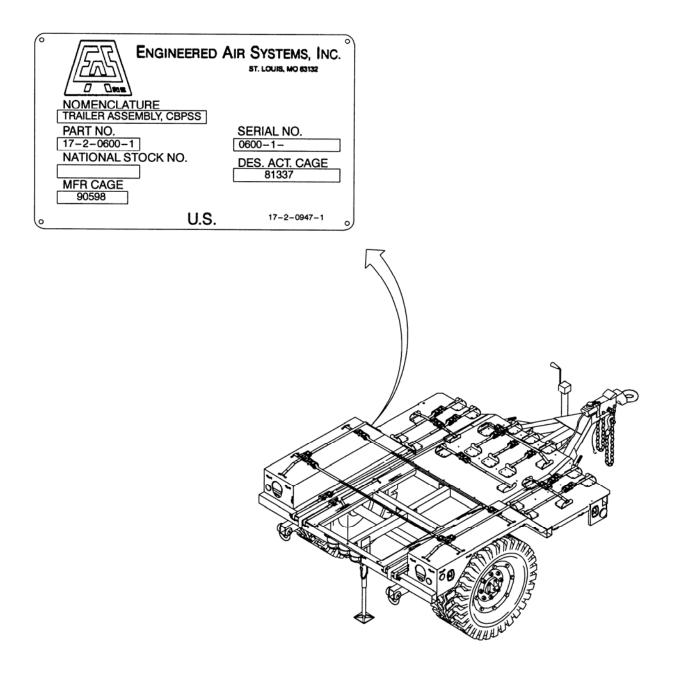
Decals and Instruction Plates (Sheet 9 of 10)
